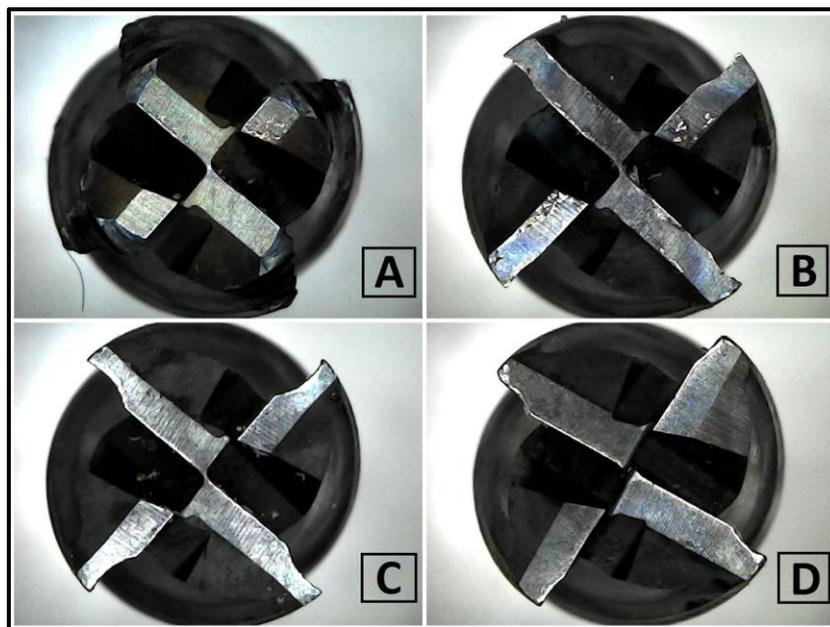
Cutter faces of the end mill after use, A (not nitrided), B (400°C), C (450°C) and D (500°C) (Author, 2019).
